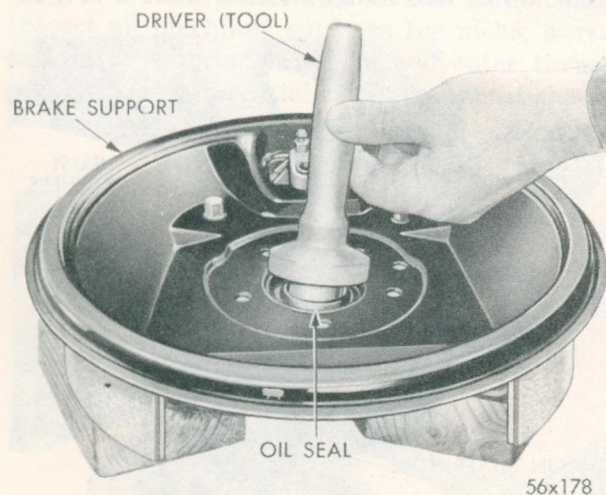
Removing Inner Oil Seal Using Tool C-637
